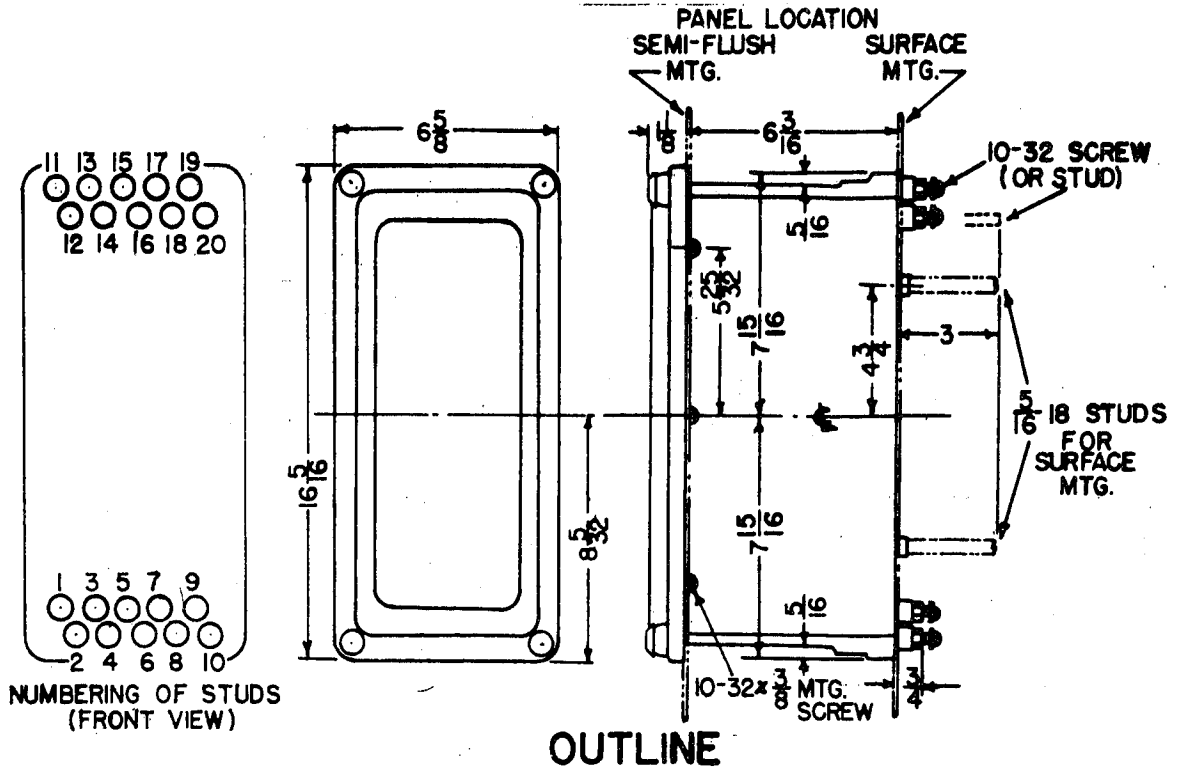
(K-6209274-2) Outline And Panel Drilling Dimensions For The GGP53B Relay
